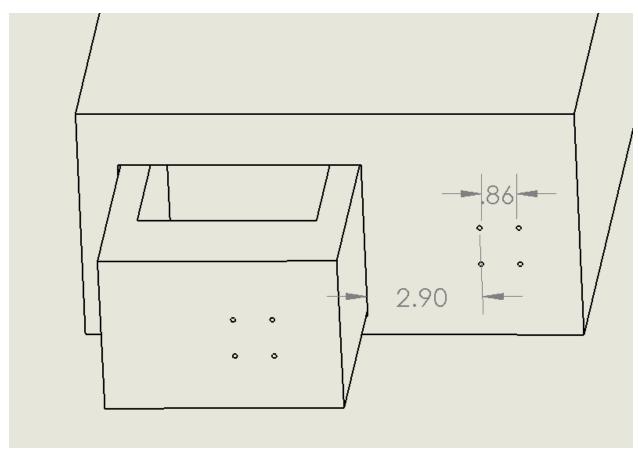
The Cash Deposit Box Inside the Slot on the CashGrab Machine (Inches)
